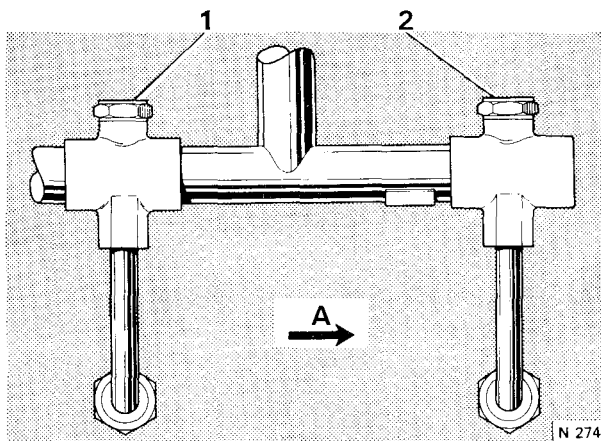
'A' BANK AIR INJECTION MANIFOLD
